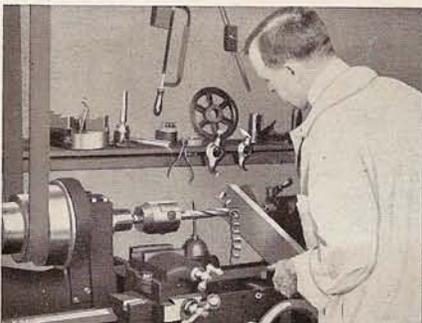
Lathe used as Drill Press for Drilling Hole in Flat Piece of Work.
